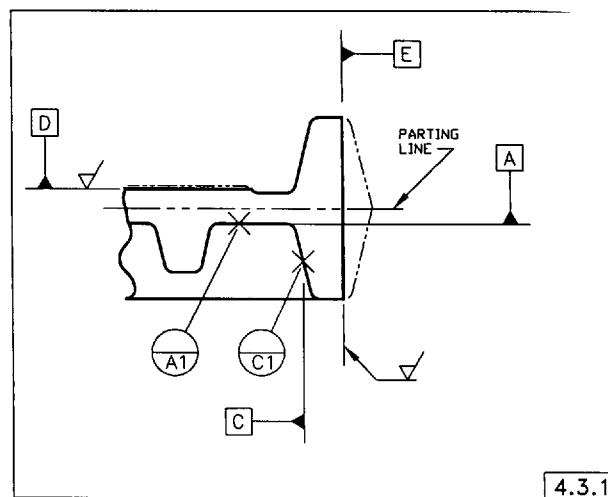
DATUM TARGETS LOCATED OPPOSITE MACHINED SURFACES
